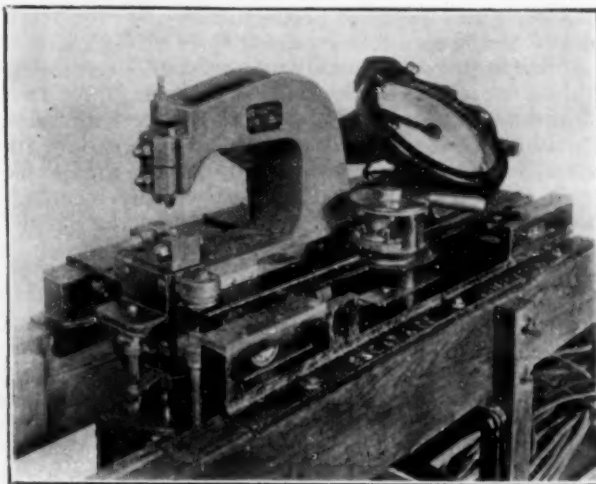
SNEAD HB-4 MACHINE, RIGHT HAND HEAD, FRONT VIEW
